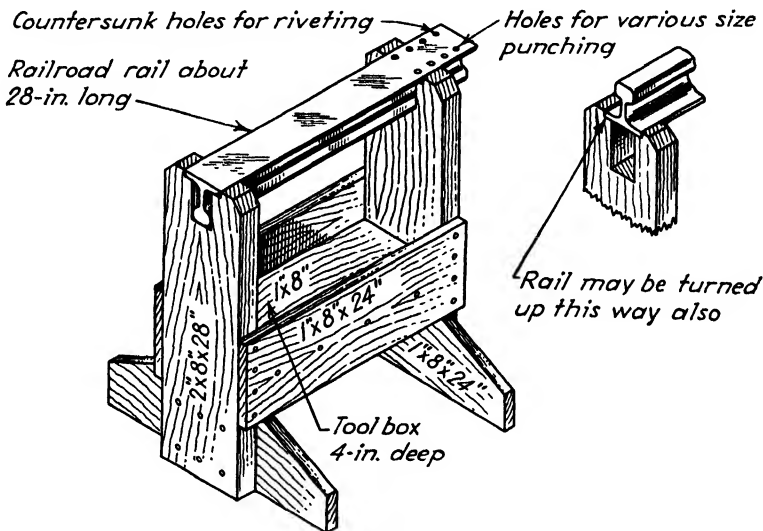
A piece of railroad rail mounted on a stand makes a practical lightweight anvil.
